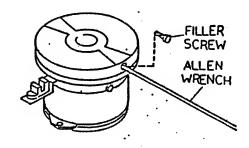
DAMPER ASSEMBLY Removal Procedure
